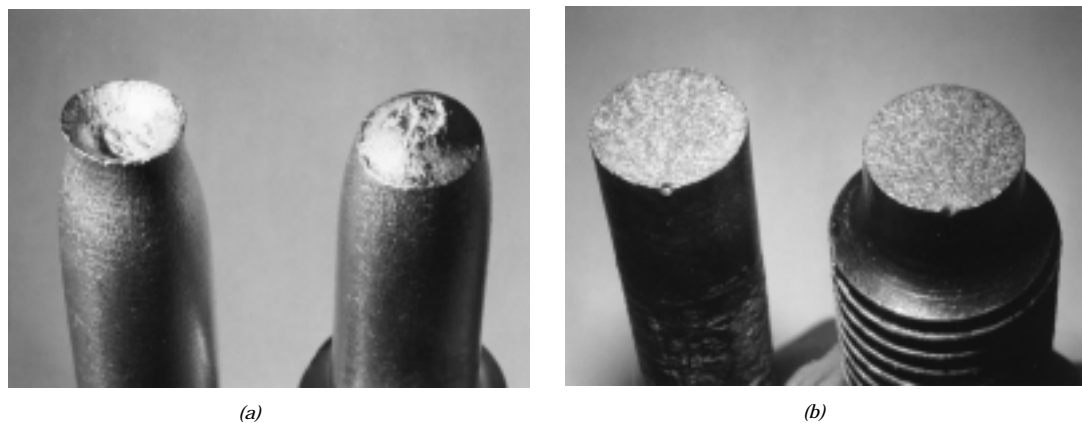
(a) Cup-and-cone fracture in aluminum. (b) Brittle fracture in a mild steel.
